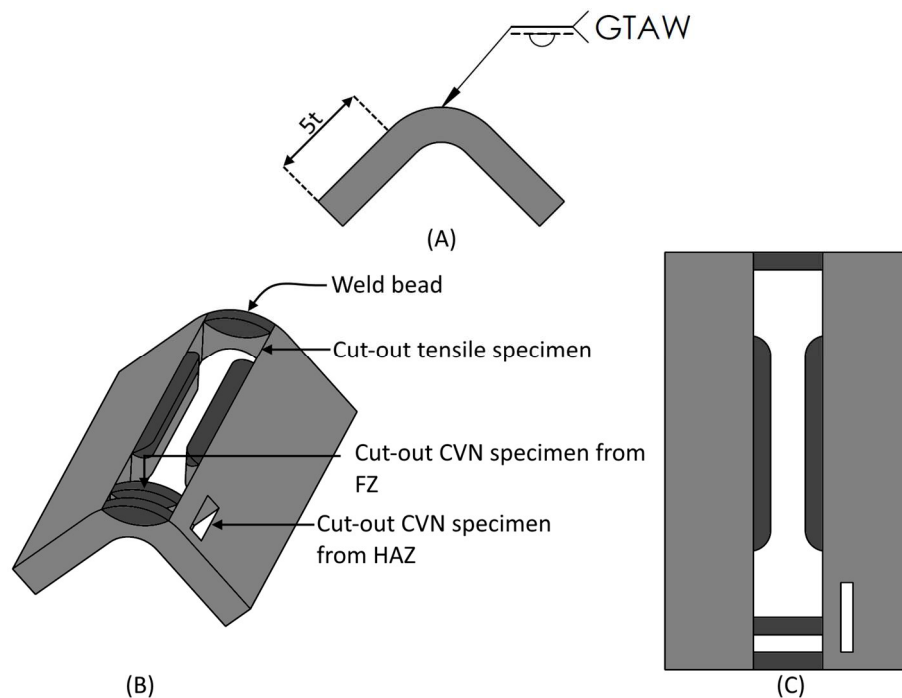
Suggested welding set-up and specimens to investigate effects of cold-forming and welding heat individually.
